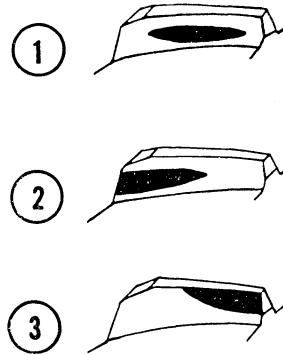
Mesh pattern on bevel ring gear teeth. (1) is correct tooth bearing; (2) bevel pinion is too close to cone center; (3) bevel pinion is too far from cone center.
